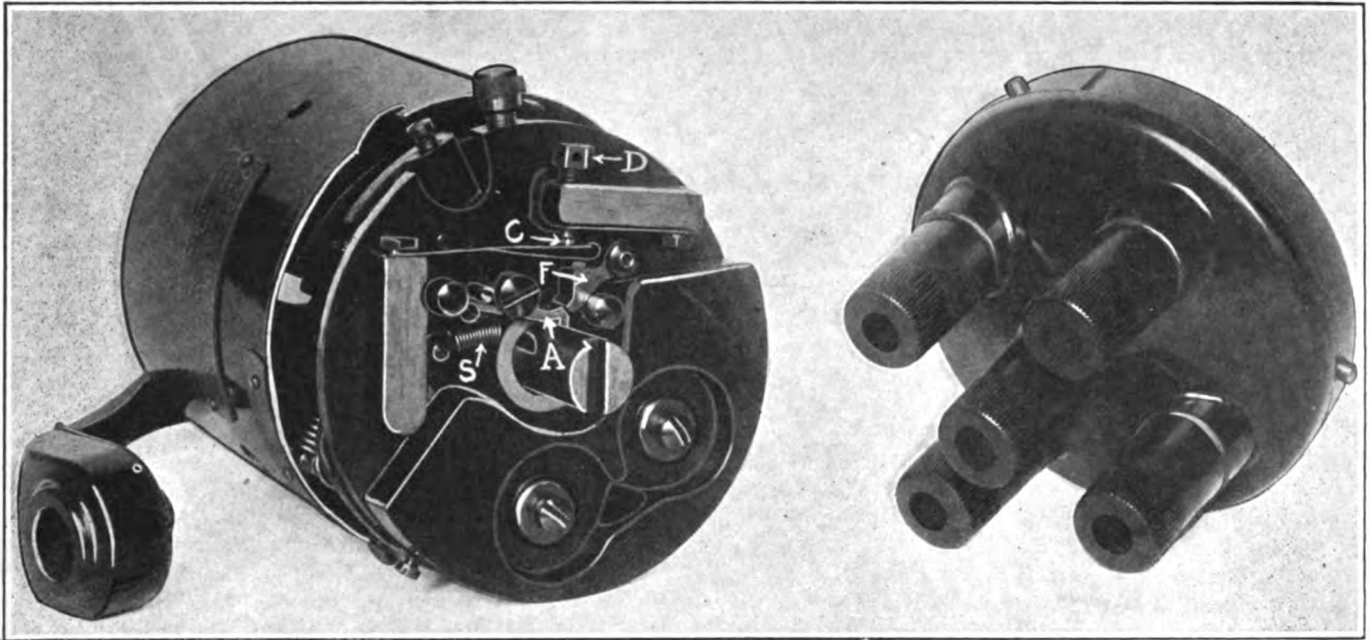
Showing assembly of new Unisparker with rubber cover plate removed and details of the contact breaker mechanism
